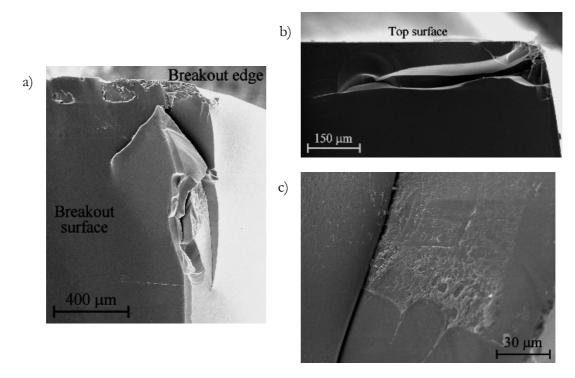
Fracture initiating flaws in EH_WS coated samples with a) scoring damage; b) breakout damage and c) shark's tooth flaws. Coating infiltration can only be observed in c).
